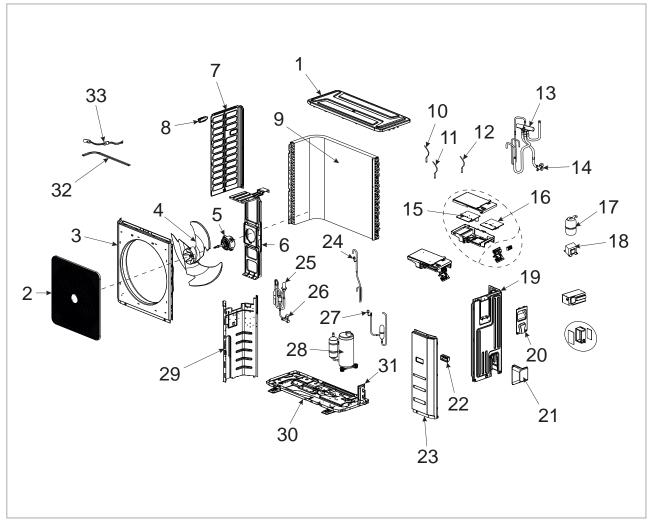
Exploded view of the unit RVD 1055 DC AT
